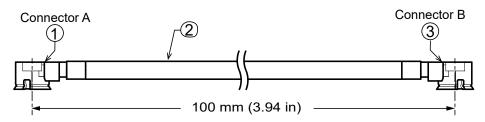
Product Dimensions for the CSG-UFFR-100-UFFR Cable Assembly
